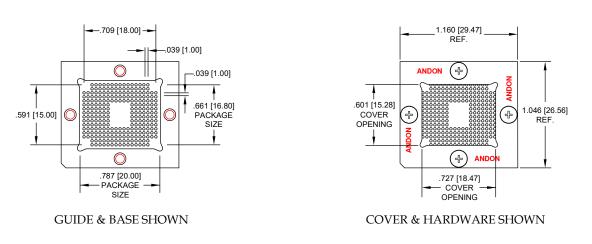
258 Pins Thru-Hole: 694-258-TH-491-R27-L14-1 Surface Mount: 694-258-SM-500-R27-L14-1 Rollerball® : 694-258-SM-RB593-R27-L14-1
